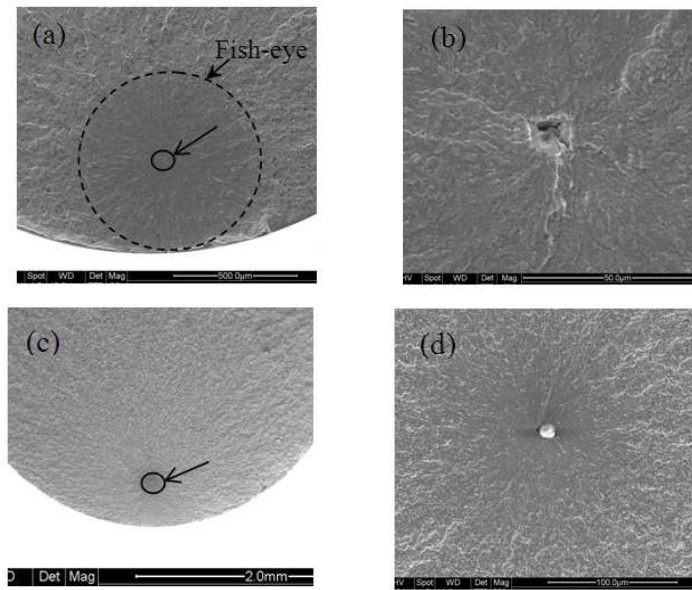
Typical ultrasonic fracture surface for specimens of high-strength steel by SEM: (a) and (c) whole view; (b) and (d) subsurface crack from internal defect or non-metallic inclusion.
